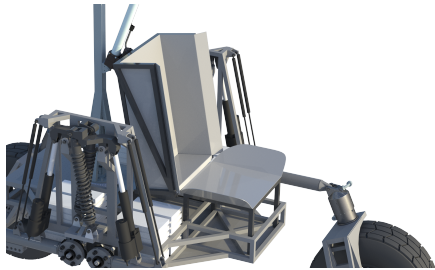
Bent sheet steel and welded seat chassis concept
